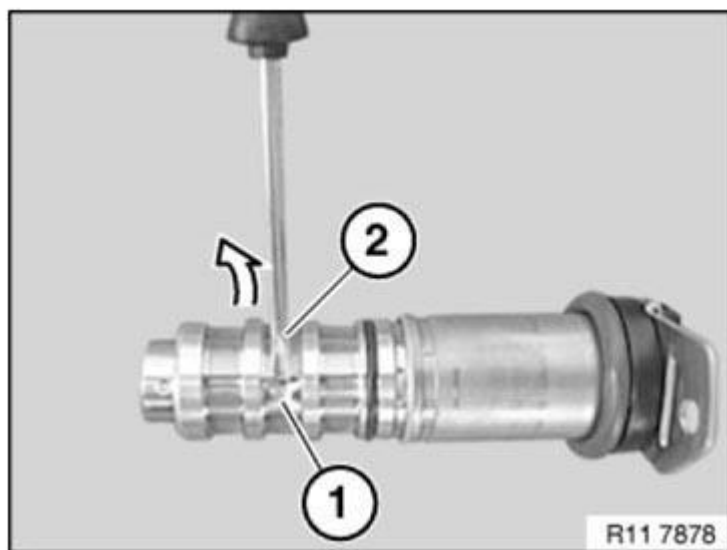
Bending Open Welding Spots On Filter Element With Screwdriver
